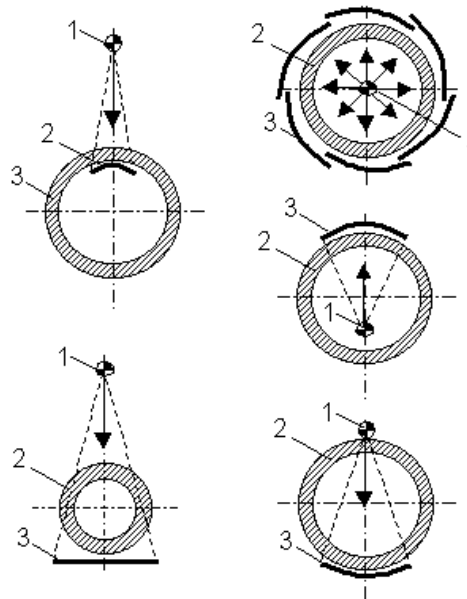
Schematic Representation of Radiographic Inspection of Welded Joints in Cylindrical Elements [8]
